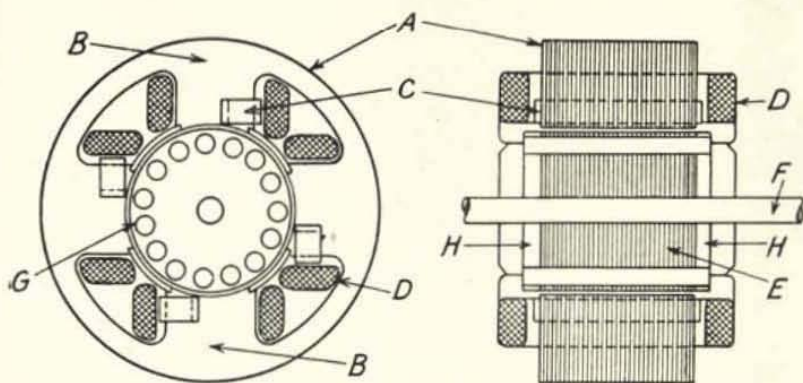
SIMPLE SQUIRREL CAGE INDUCTION MOTOR
